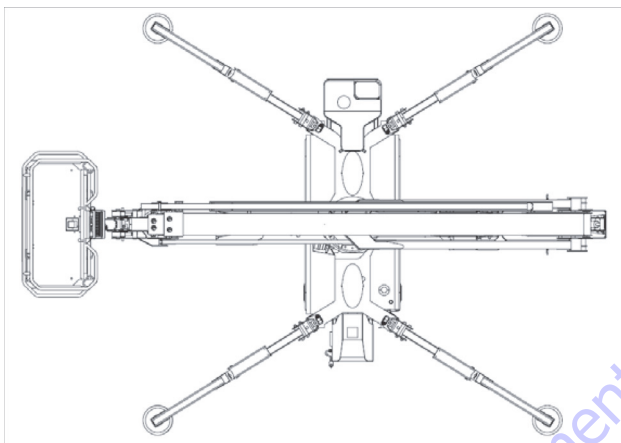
Cover position engine X17JP/X500AJ X20JP/X600AJ
